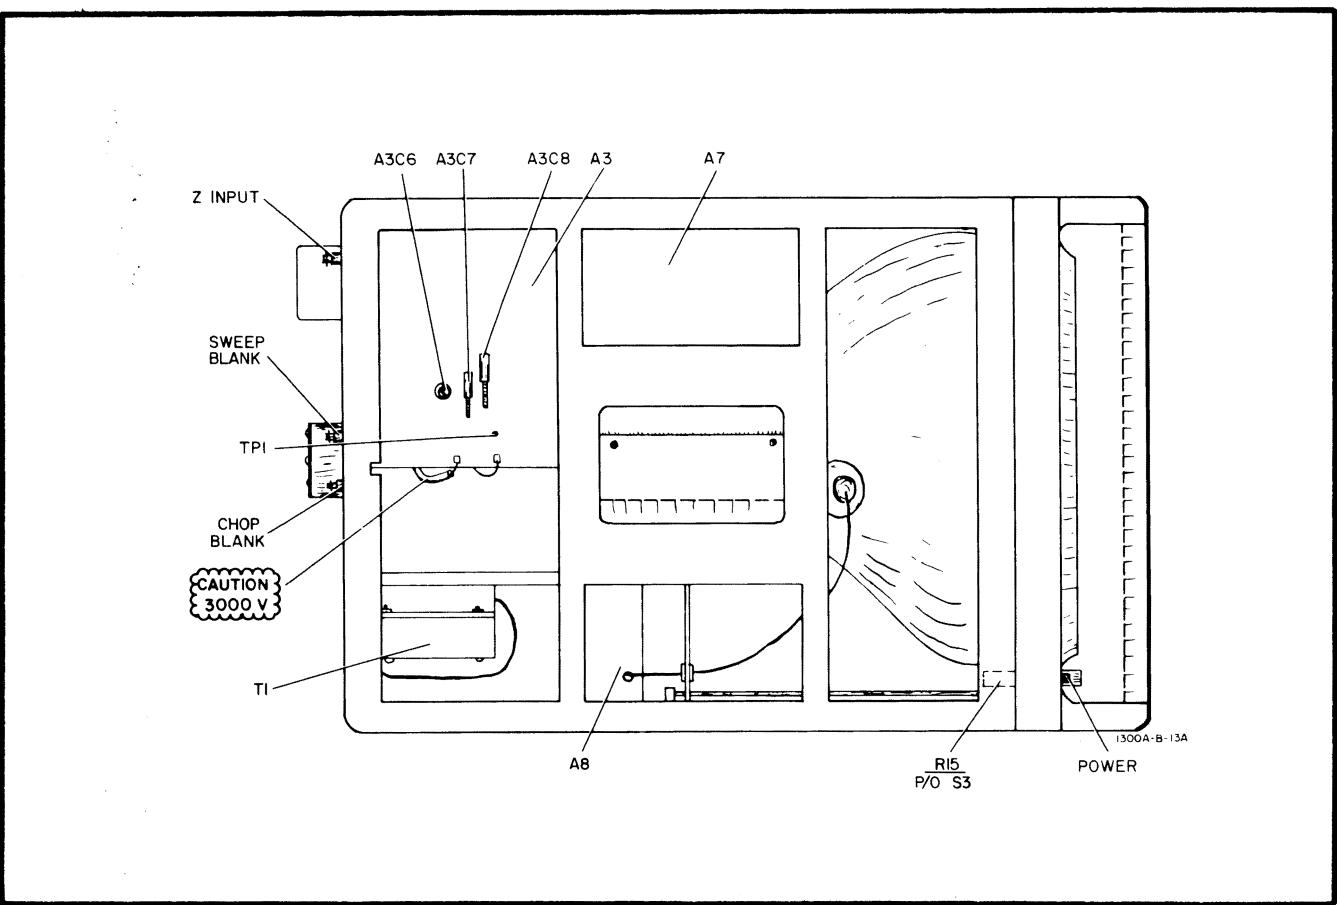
Assembly and Adjustment Locations, Left Side View
